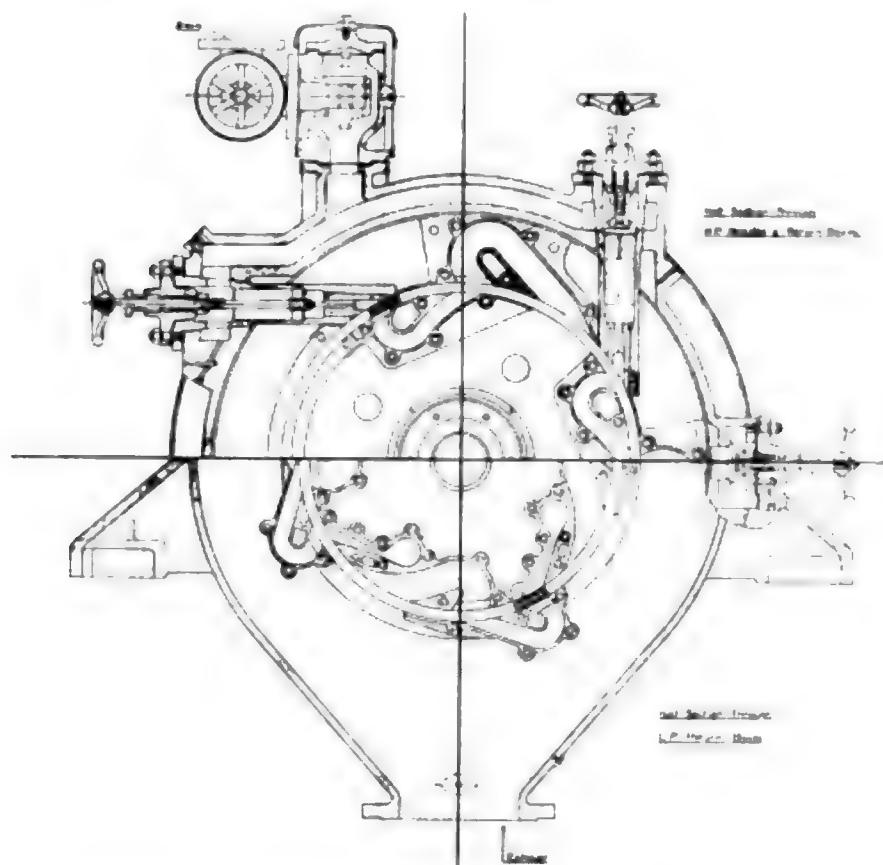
END SECTION OF TURBINE MANUFACTURED BY W. H. ALLEN, SON & CO., LTD., BEDFORD.
